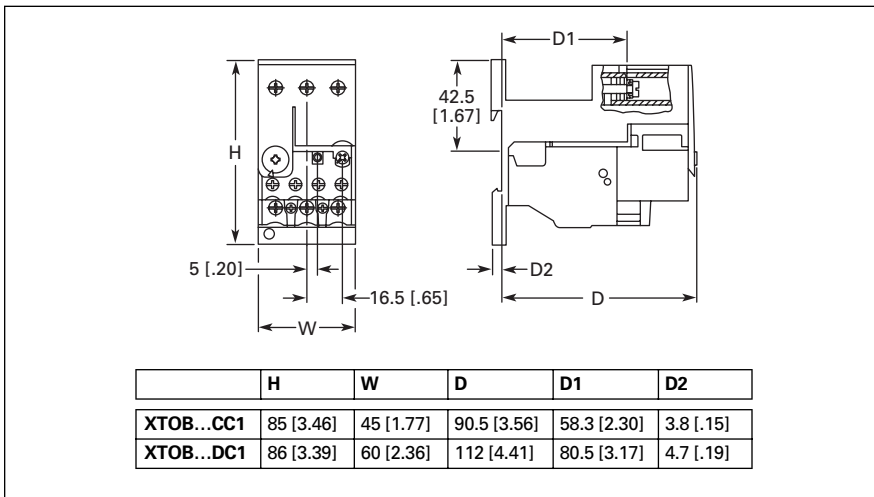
Frame B – C, XTOBXDINC DIN Rail or Panel Mount Adapter and Frame D, XTOBXDIND DIN Rail or Panel Mount Adapter — Approximate Dimensions in mm [in]
